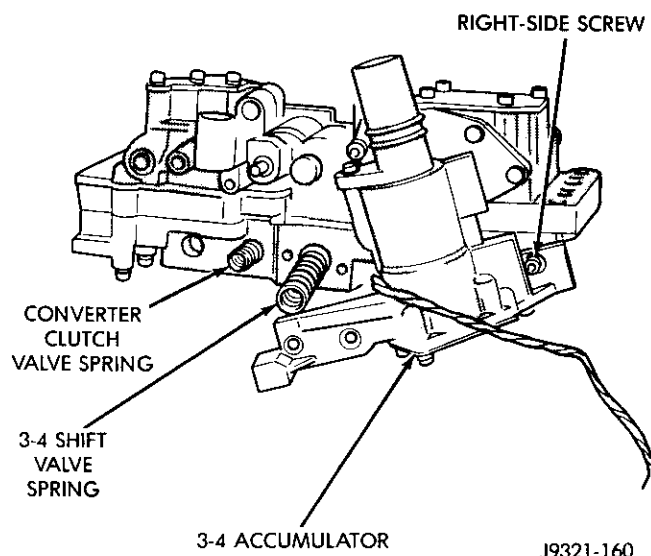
Converter Clutch And 3-4 Shift Valve Springs
